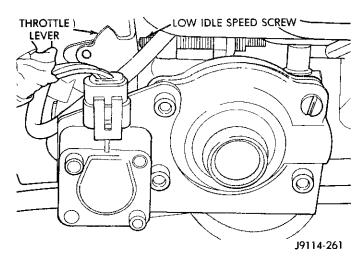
Throttle Lever Contacting Low Idle Speed Screw
